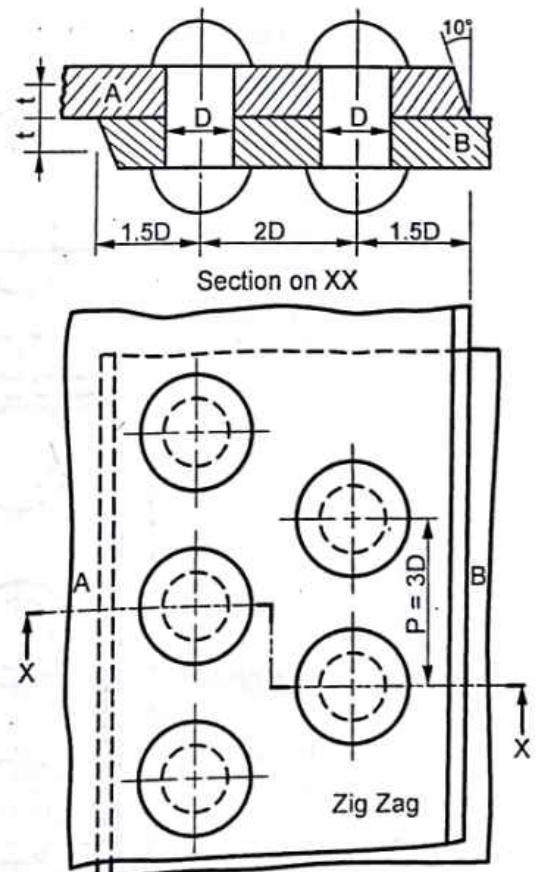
(b) Double riveted lap point zigzag riveting
